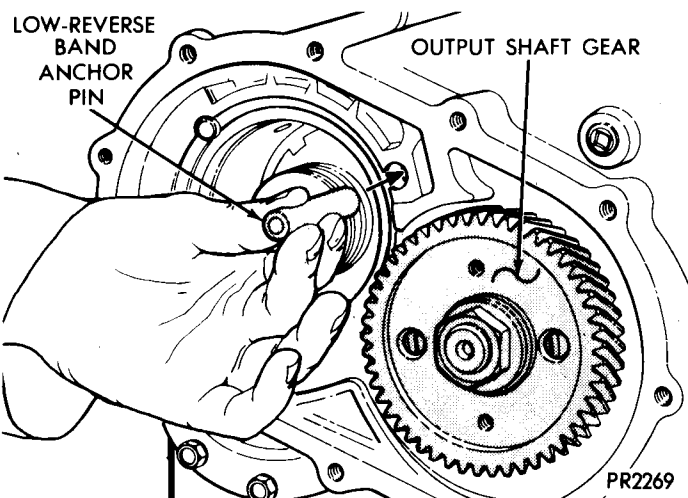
Remove or Install Low-Reverse Band Anchor Pin
